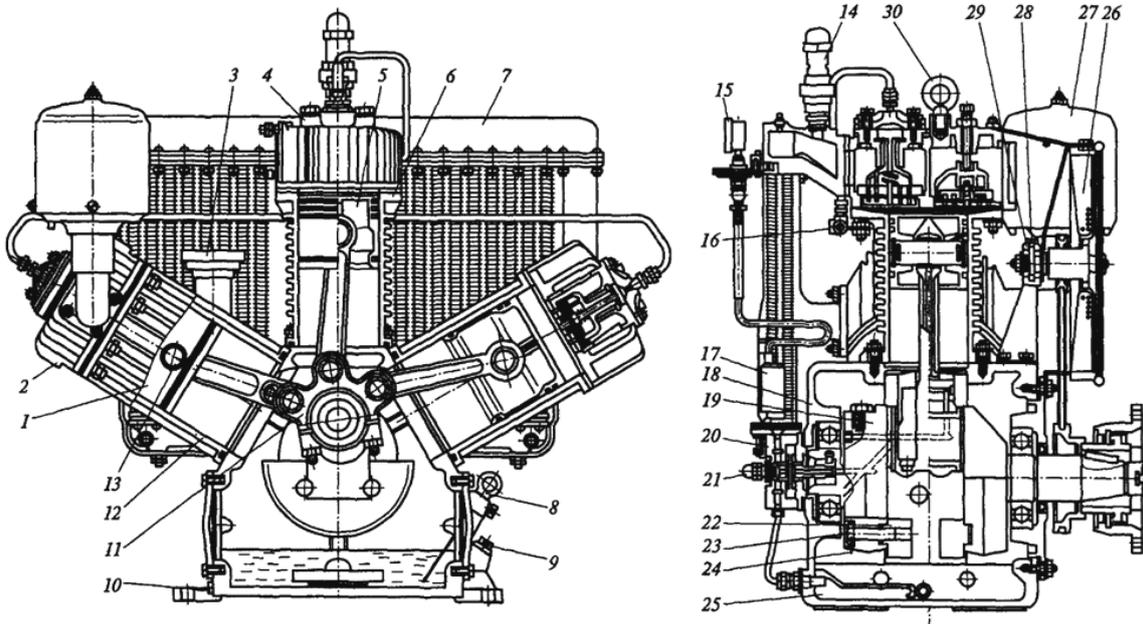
Compressor KT6: 1 – low pressure cylinder (LPC) piston; 2 – valve box LPC (first degree); 3 – breathalyzer; 4 – high pressure cylinder (HPC) valve box (second degree); 5 – piston HPC; 6 – HPC; 7 – refrigerator; 8 – oil dipstick (probe); 9 – oil filler plug; 10 – oil drain plug; 11 – connecting rod assembly; 12 – LPC; 13 – piston pin; 14 – safety valve; 15 – oil pressure gauge; 16 – tee for connecting the pipeline from the pressure regulator; 17 – tank for dampening pulsations of the pressure gauge needles; 18 – housing (crankcase); 19 – crankshaft; 20 – oil pump; 21 – pressure reducing valve; 22 – additional balancer; 23 – additional balancer mounting screw; 24 – cotter pin; 25 – oil filter; 26 – fan; 27 – air filter that sucks; 28 – fan belt tension adjustment bolt; 29 – fan bracket; 30 – eye bolt
